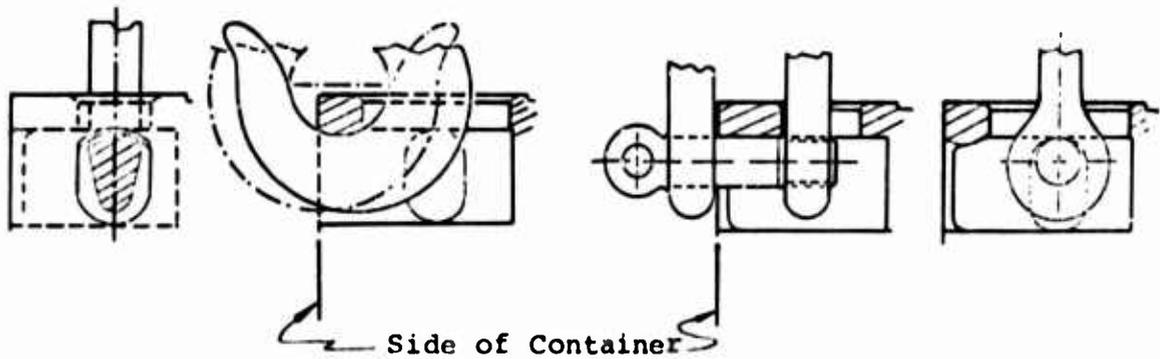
Hook and Shackle Attachments Protruding Beyond Side of Container.
